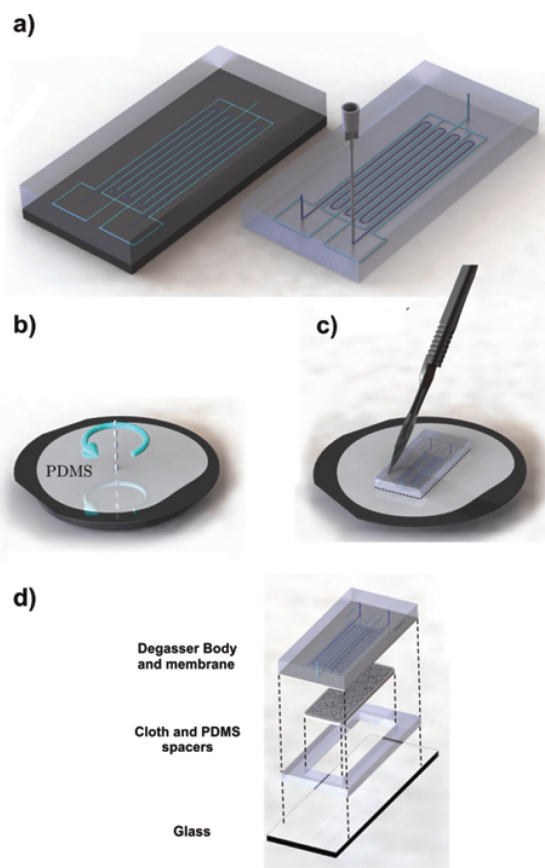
Schematic of the fabrication process for the degasser. a) Casting and piercing of upper degasser body. b) Spin coating of bottom PDMS membrane. c) Merging of degasser body and membrane via plasma bonding. d) Exploded drawing of bottom vacuum channel using PDMS and cloth as spacers.
